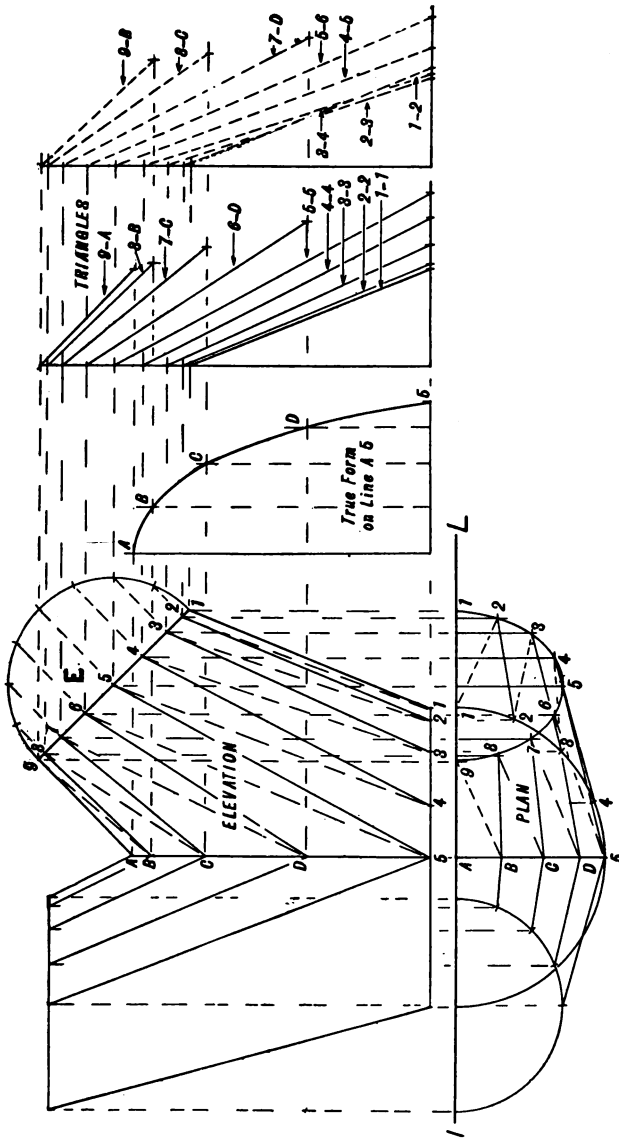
Semi-Plan, Elevation, and Diagram of Triangles.
